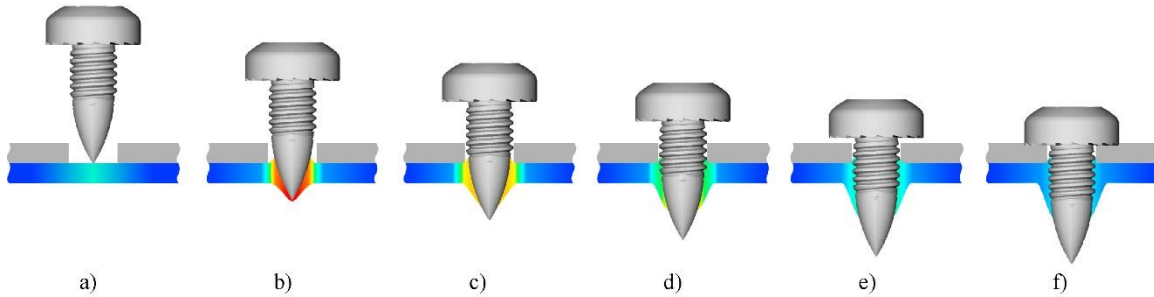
Steps of FDS process: a) Warming up b) Penetration of the material c) Forming of the draught d) Thread forming e) Full thread engagement f) Tightening [18]
